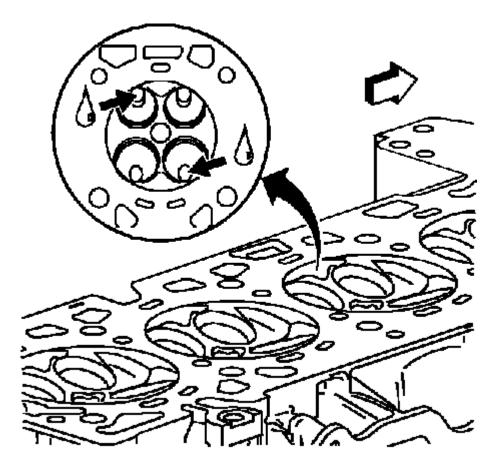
Cylinder Head Plugs Courtesy of GENERAL MOTORS COMPANY
